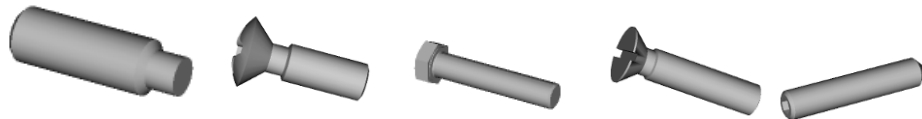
CAD parts of screws provided by manufacturers on online part library Traceparts.com
